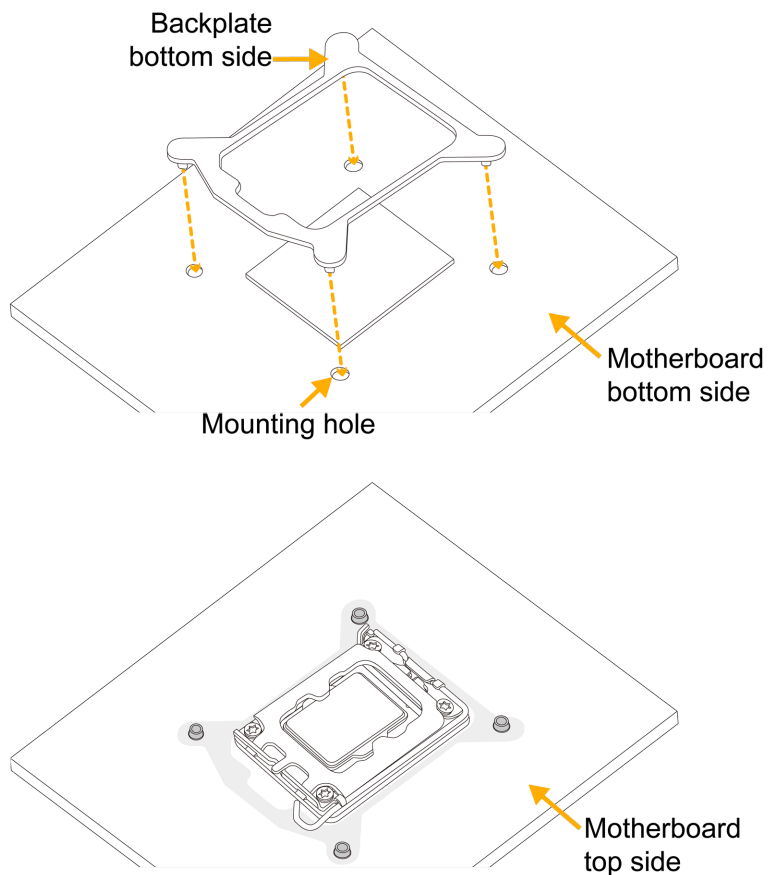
Attaching the Backplate to the Bottom Side of the Motherboard
